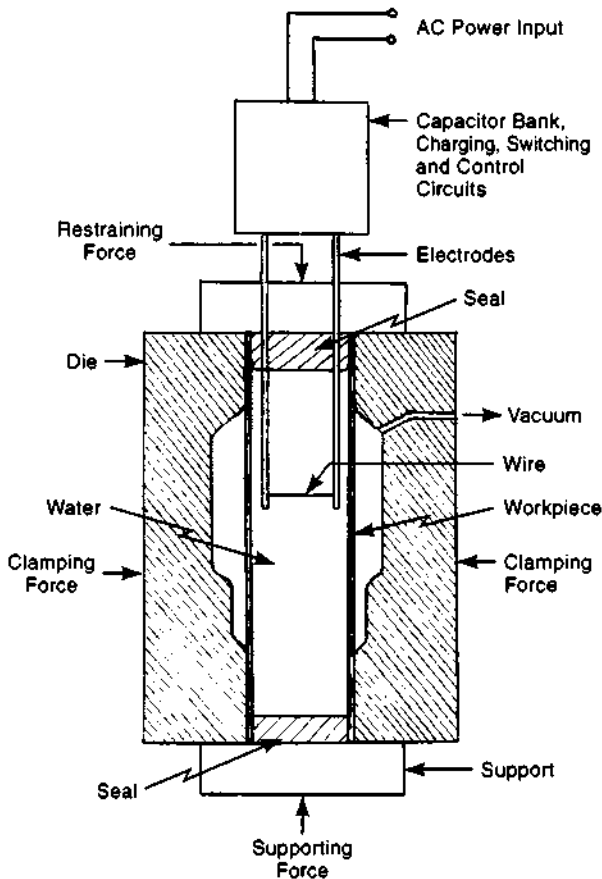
J5 Tooling arrangement for use of electro-hydraulic forming to change the shape of a tubular workpiece.
